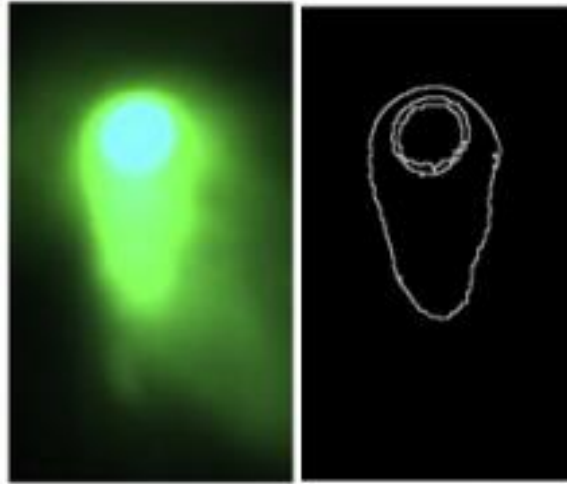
Captured weld pool image and extracted weld pool boundary [20].
